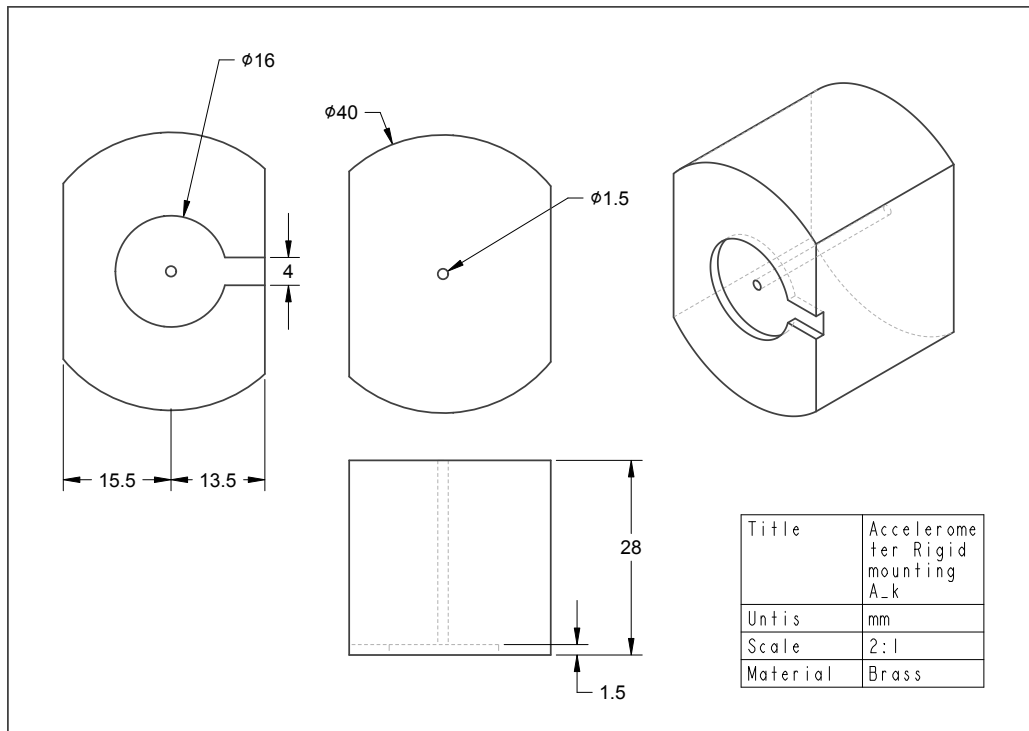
Technical drawing of Rigid Mounting Solution for  $\mathcal{A}_k$  with accelerometer.
